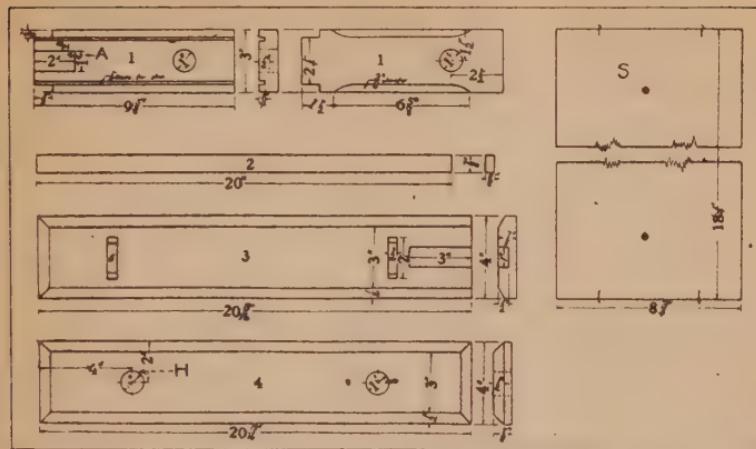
Construction of observation-hive. Drawing by Assistant Scoutmaster Donald T. Ries
